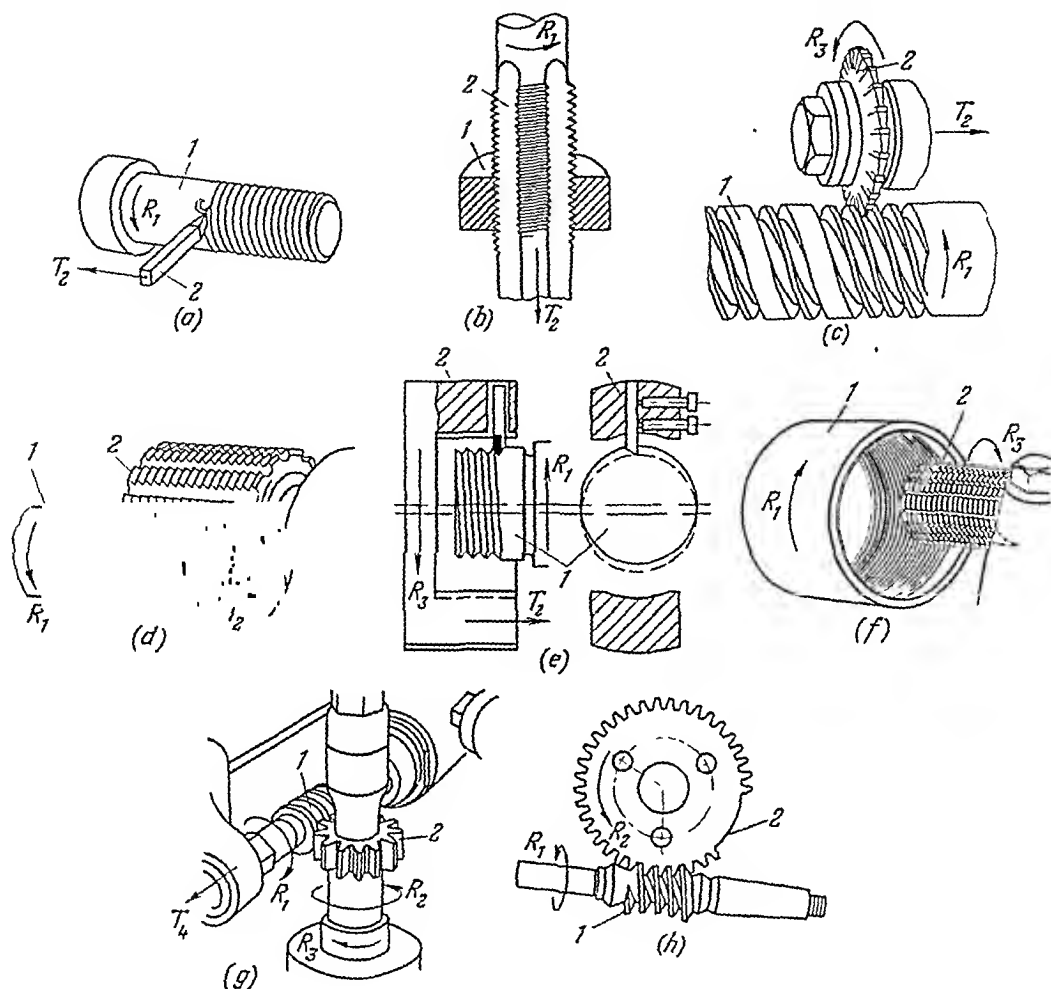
Motions of the operative members in thread-making machines (1—work; 2—cutting tool):
